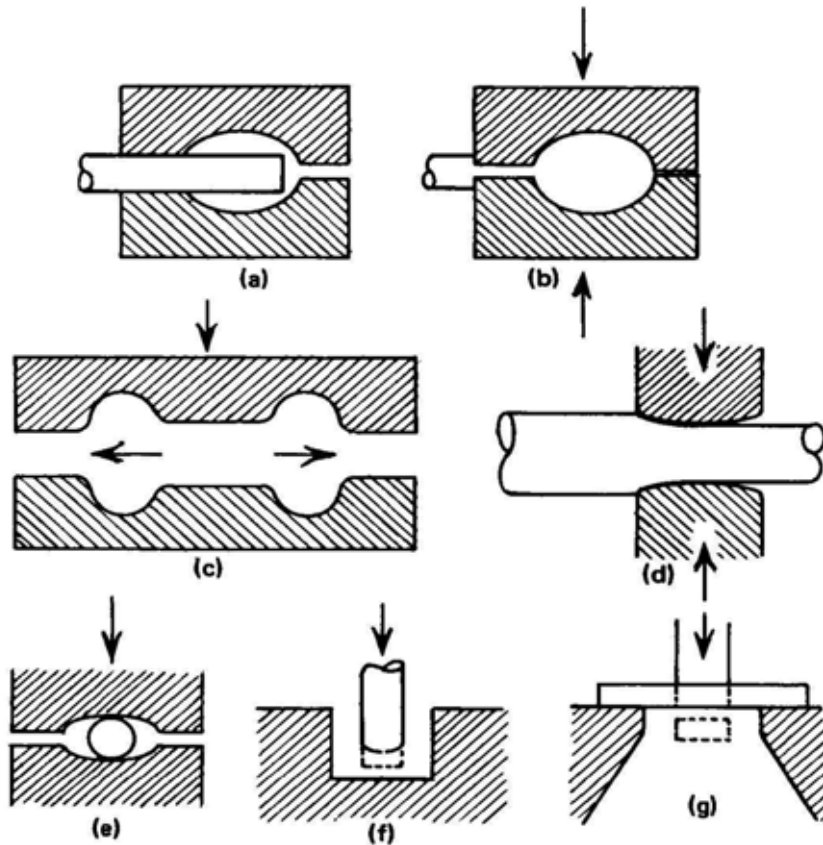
Forging operations; (a, b) edging; (c) fullering; (d) drawing; (e) swaging (f) back extruding; (g) punching.
